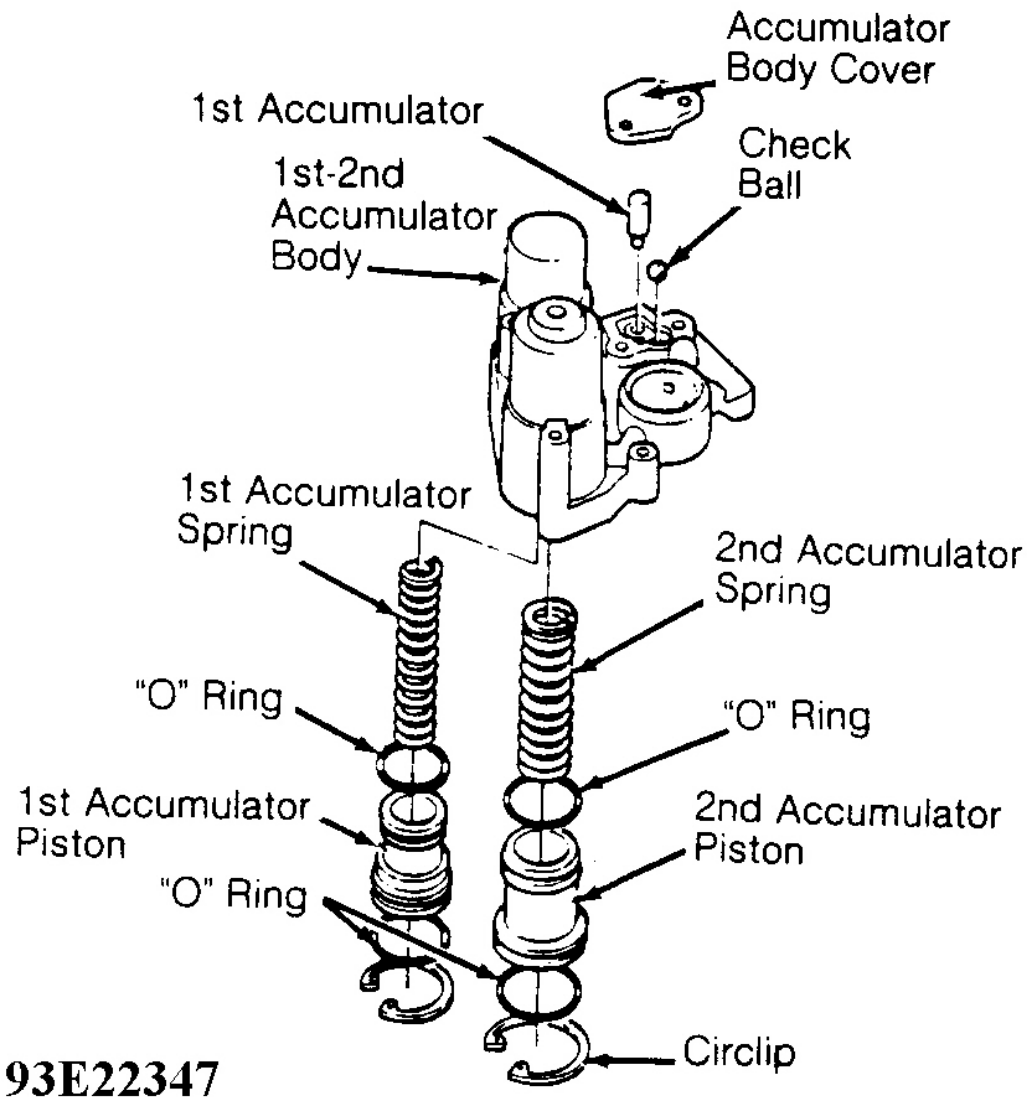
Exploded View Of 1st-2nd Accumulator Body
